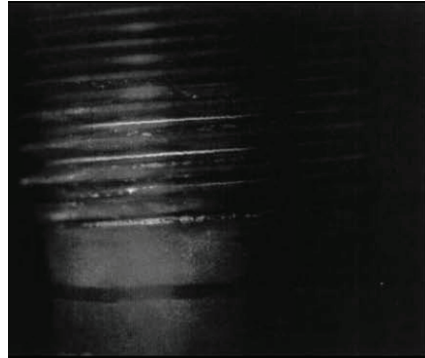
Indication on thread of bolt M 76X6 No 11, obtained by magnetic particles testing
